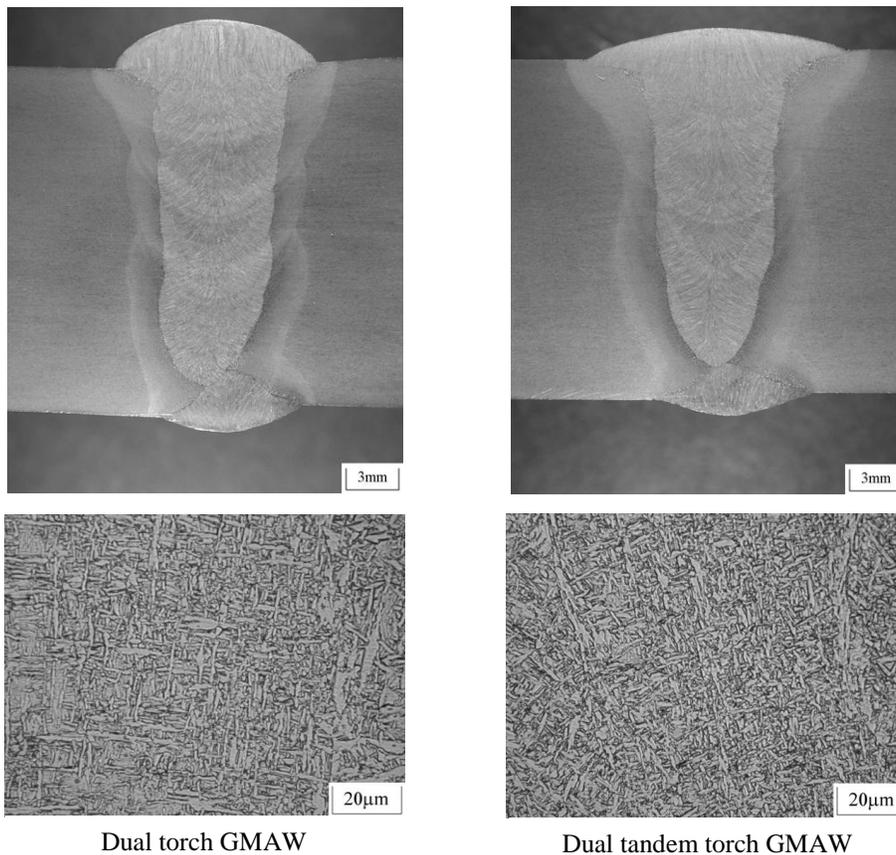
Process Variant Weld Macro Sections and cap weld microstructures
